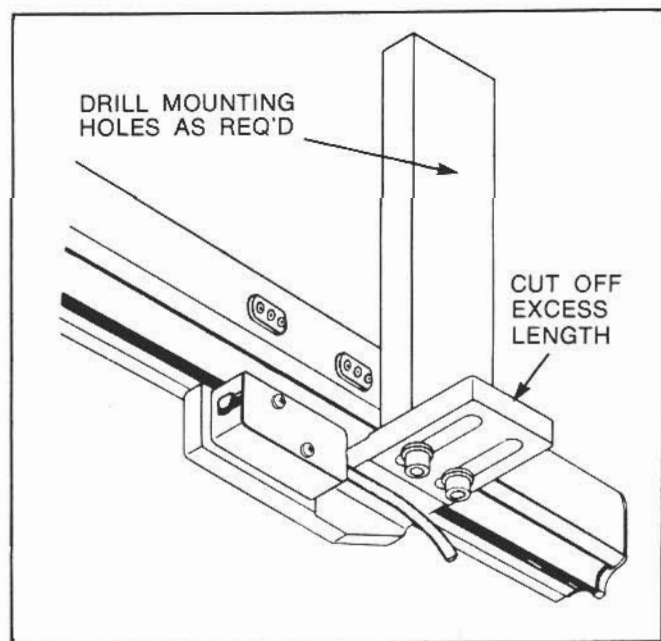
Universal Brackets with Upper Part to the Right of Reading Head.
